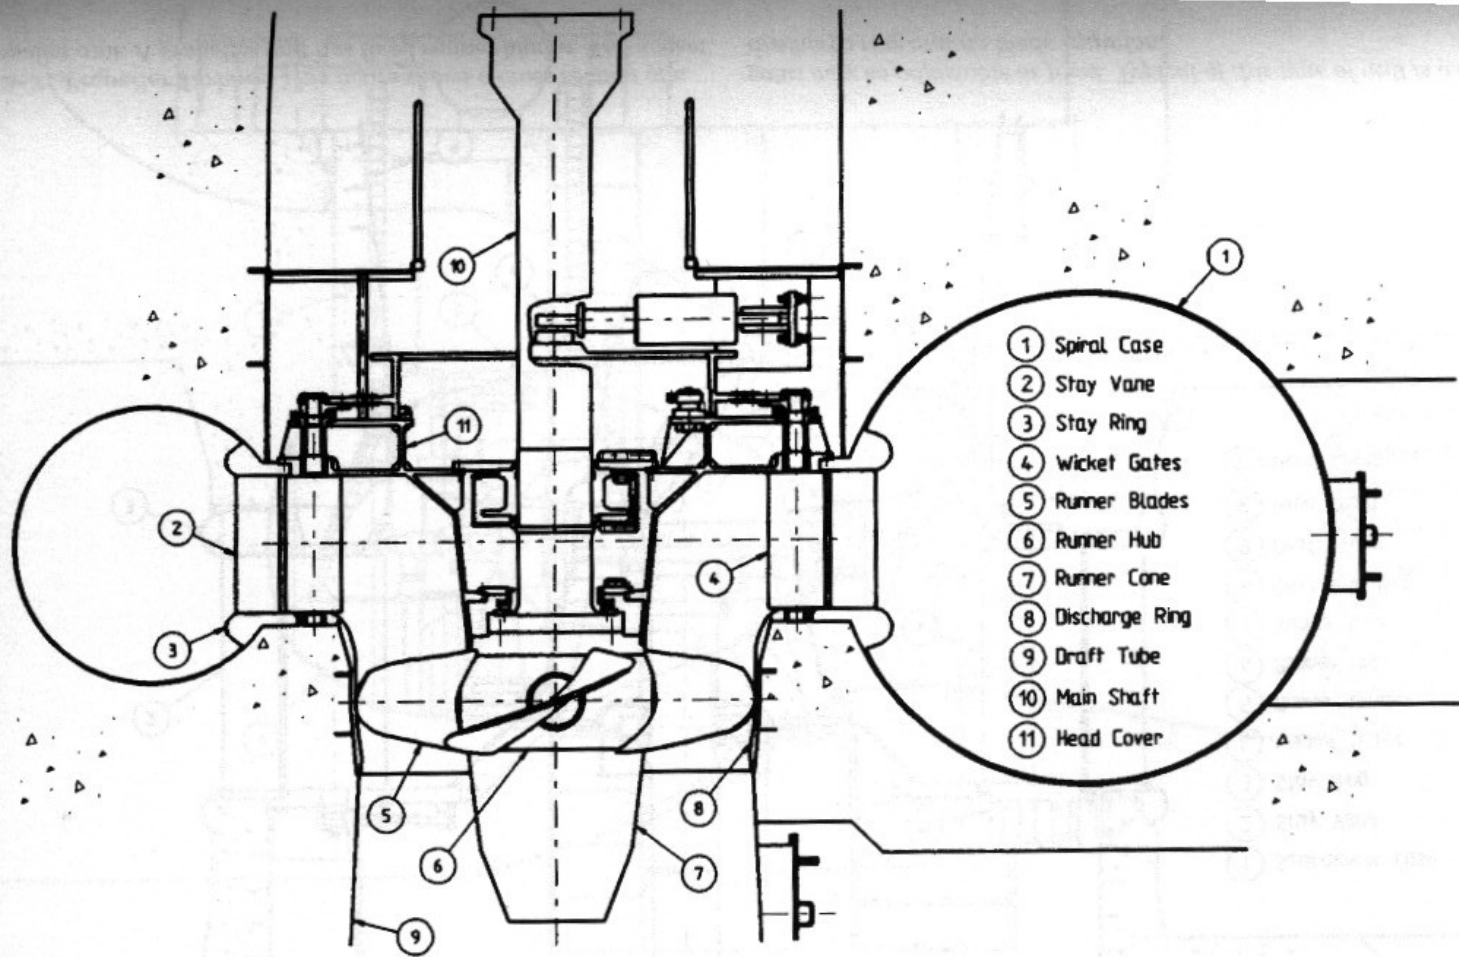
Kaplan Turbine. This figure shows a cross section of a typical Kaplan turbine. A Kaplan unit has adjustable runner blades, which
